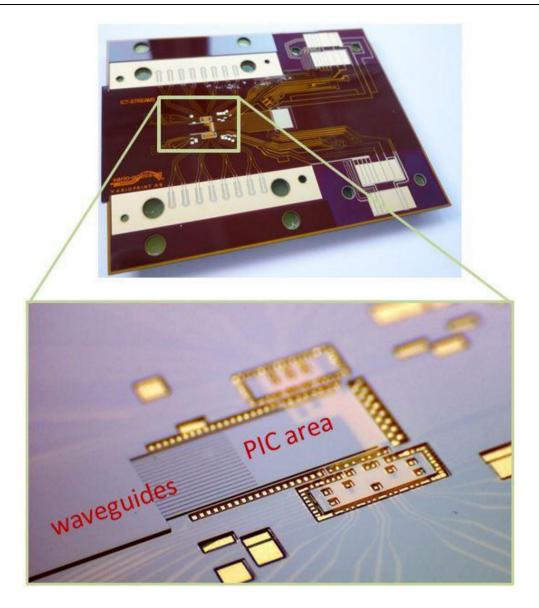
Photograph of finalized photonic board (top) and close-up of the photonic integrated chip assembly area (4h TRx version)
